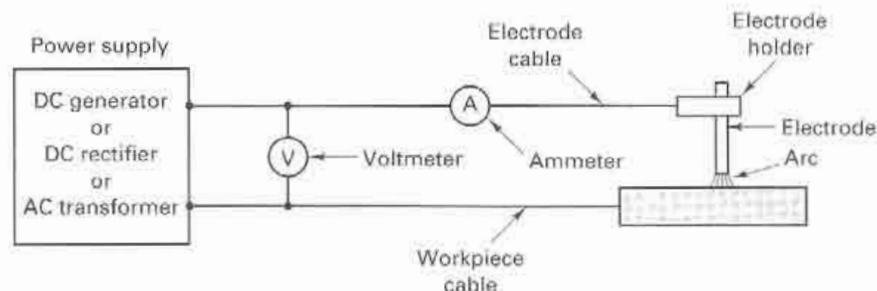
The basic electrical circuit for arc welding.
